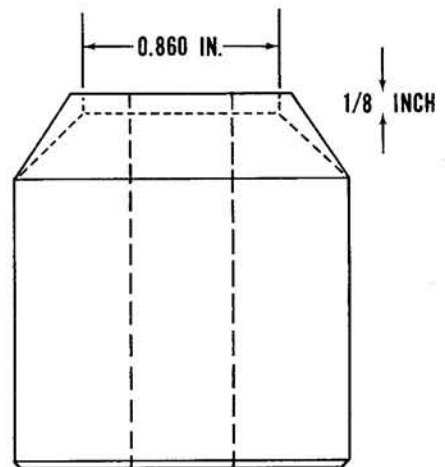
A — To adapt regular Ford clutch pilot for use in assembling and adjusting Dexta double clutch units, remove material from pilot to dimensions shown by dotted lines. Do not remove material from end of pilot; length must remain the same.
